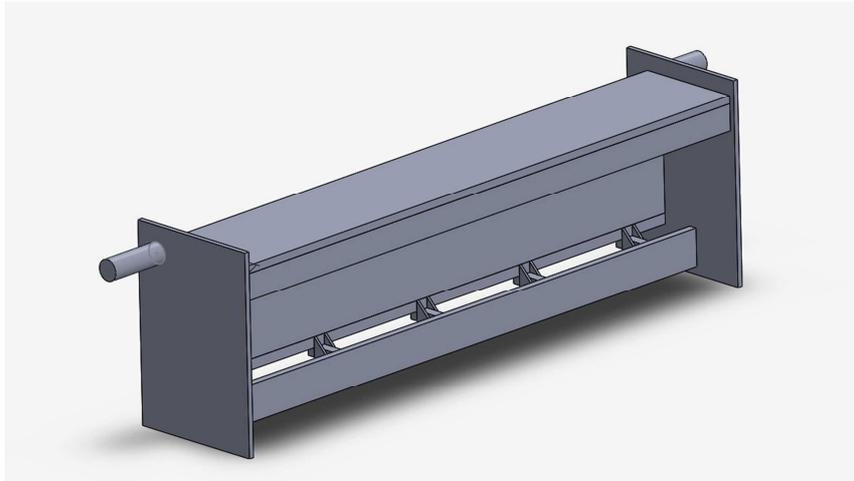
Jake's initial design of five foot full scale guideway. This is an initial design, which needs adjusting, that will be used for the torsion testing. The side plates and end bars are shown here.
